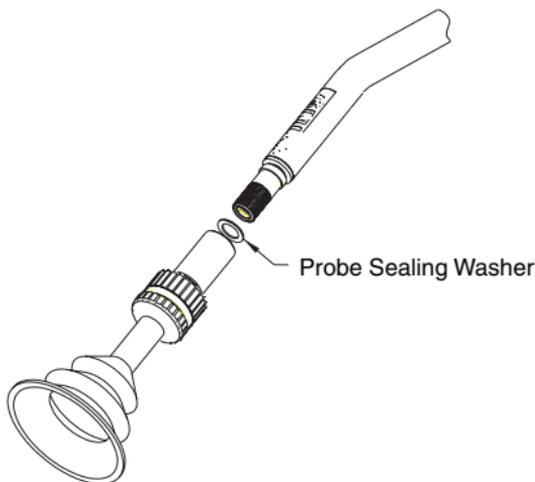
Semiconductor Survey “Bellows” Probe Filter Assembly
